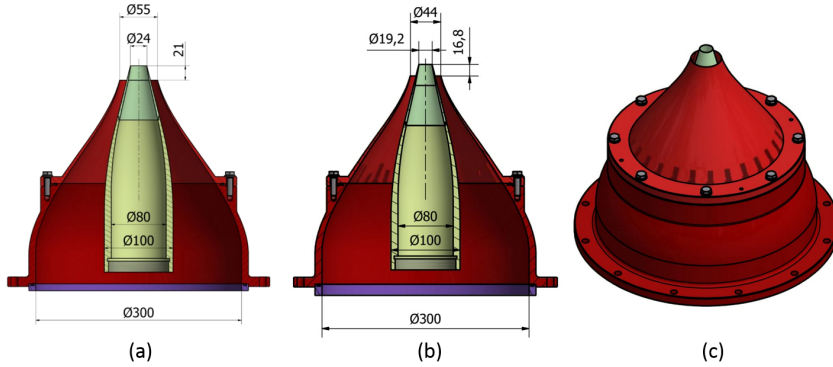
CAD drawing of the manufactured coaxial nozzle sets. Dimensions are in mm. a) Preliminary version, used for CFD and single stream jet experiments. b) Final version, used for dual stream experiments. c) 3D view.
